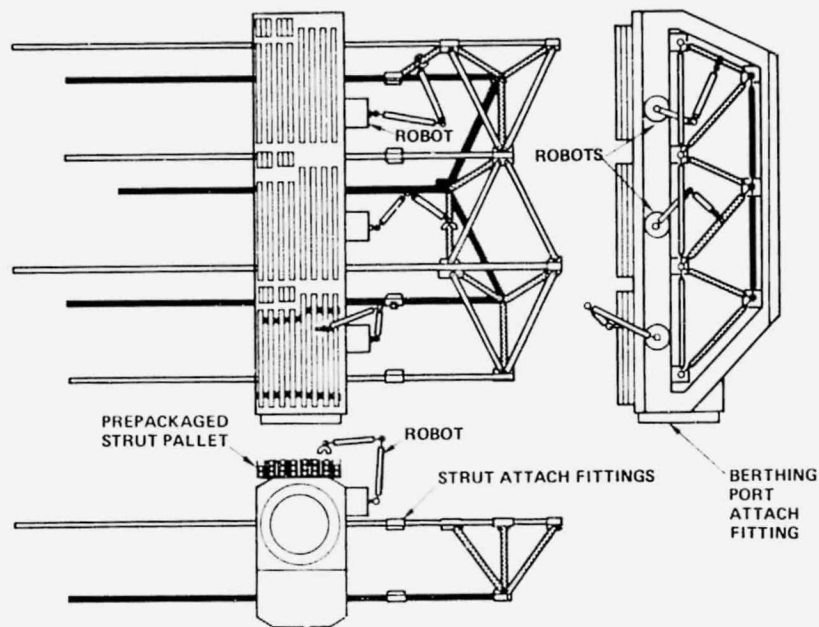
Test Article-2 Antenna Universal Truss Assembly Jig
